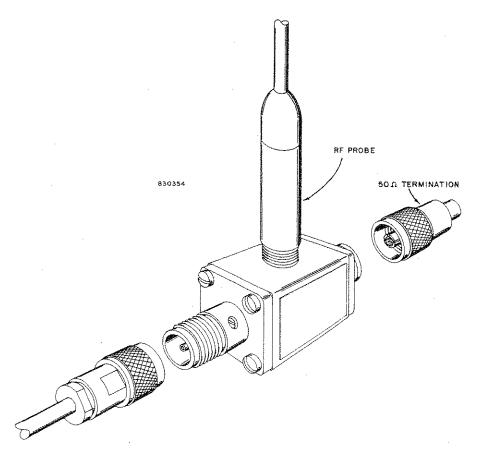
Assembly of Model 91-14A Type N Tee Adapter
